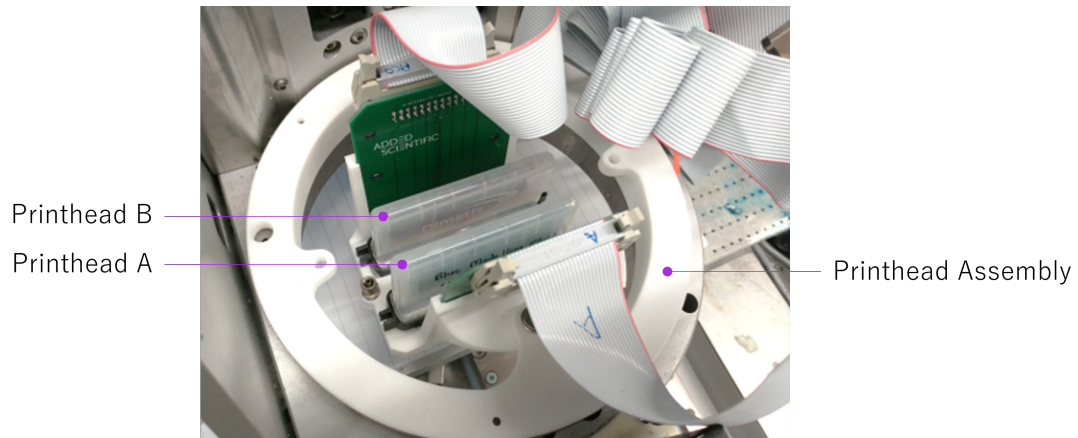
Custom dual printhead assembly holder for LP50 printer with part labels.
